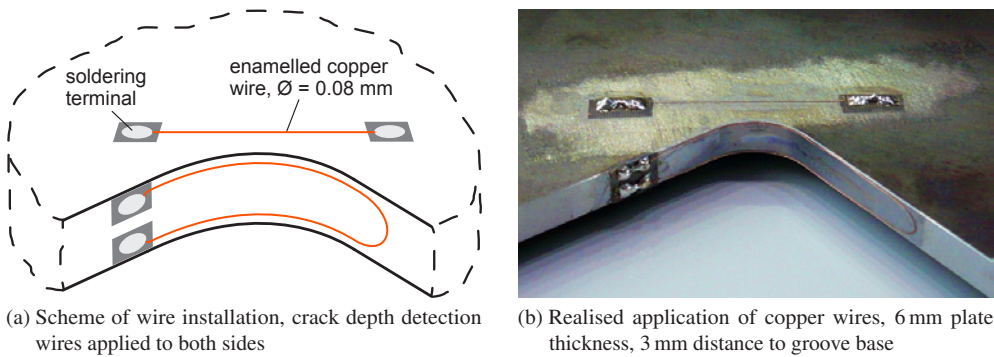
Specimen notch detail with attached crack detection wires and soldering terminals.
